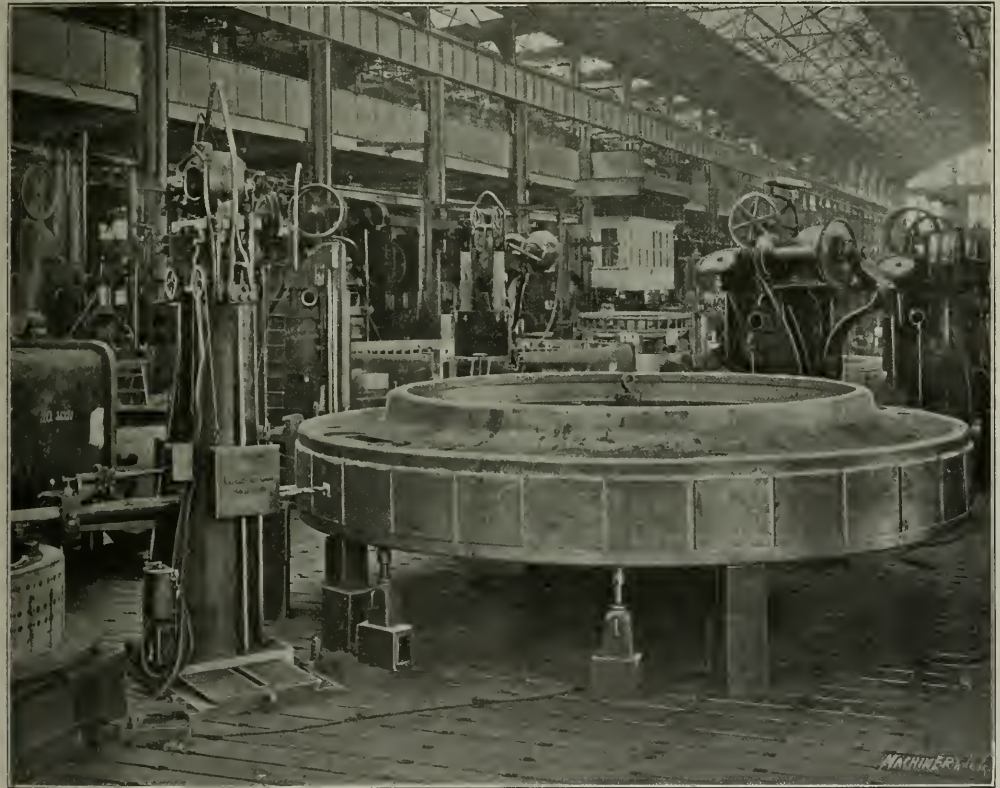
Portable Drilling and Milling Machine Operating on a Heavy Rotor, in Conjunction with a Portable Central Pivot for Indexing.
